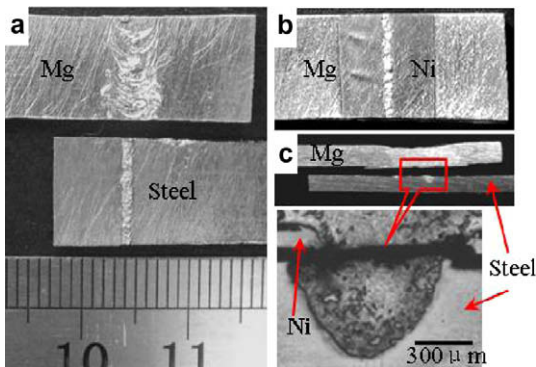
Fracture location of joints: (a) front location; (b) interfacial fracture location and (c) side fracture location.
